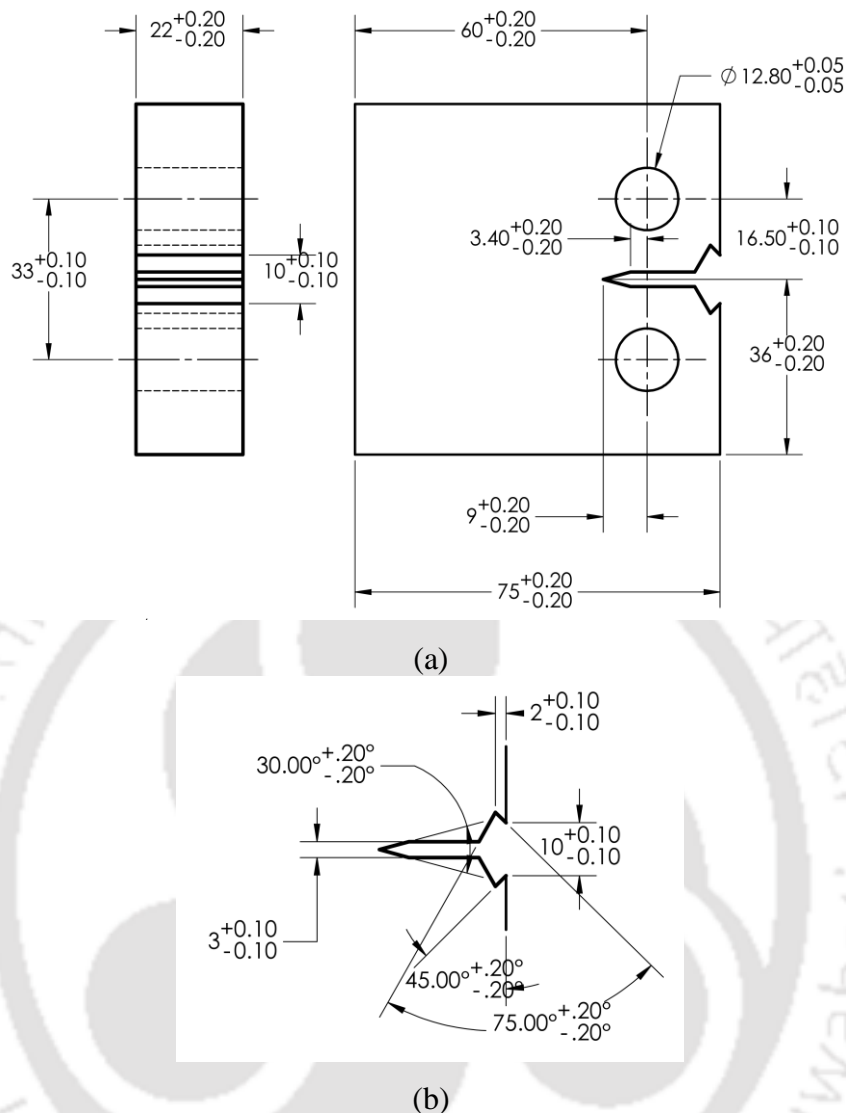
Dimensions of the (a) CT specimen and (a) notch
